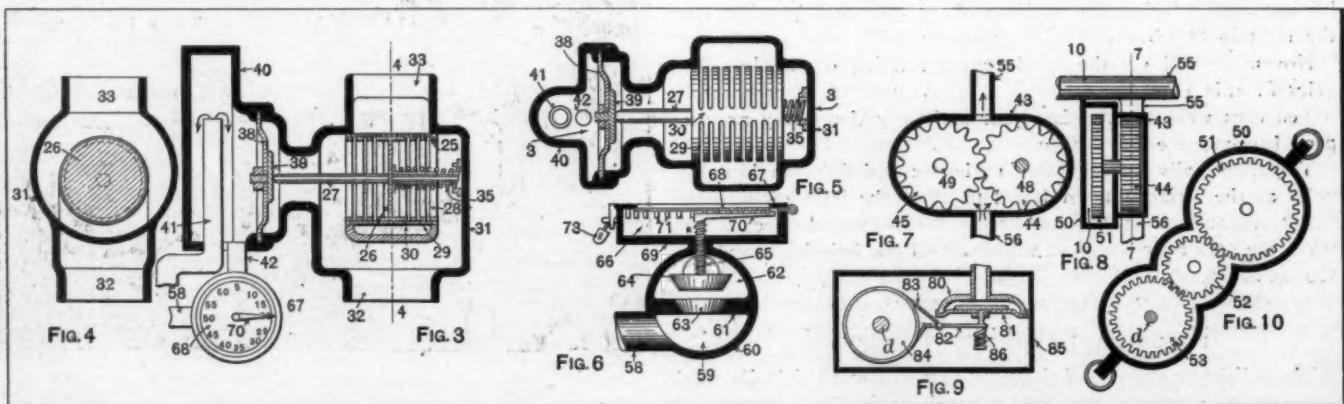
Sectional detail of throttle valve and operating mechanism. Fig. 4—Cross section on line 4-4, Fig. 3. Fig. 5—Partial plan and section of throttle valve. Fig. 6—Showing details of the speed regulating device. Fig. 7—Section on line 7-7, Fig. 8. Fig. 8—Details of the liquid pump. Fig. 9—Sectional detail of liquid-pressure brake. Fig. 10—Section on line 10-10, Fig. 8.
